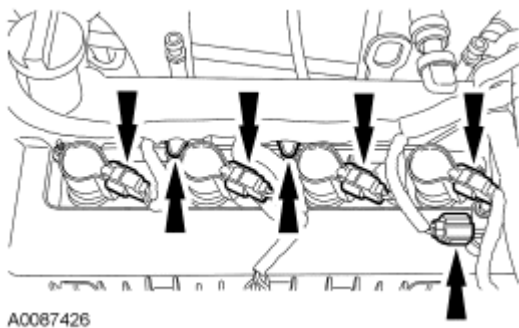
Locating Camshaft Position Sensor Electrical Connectors And Coil-On-Plug
